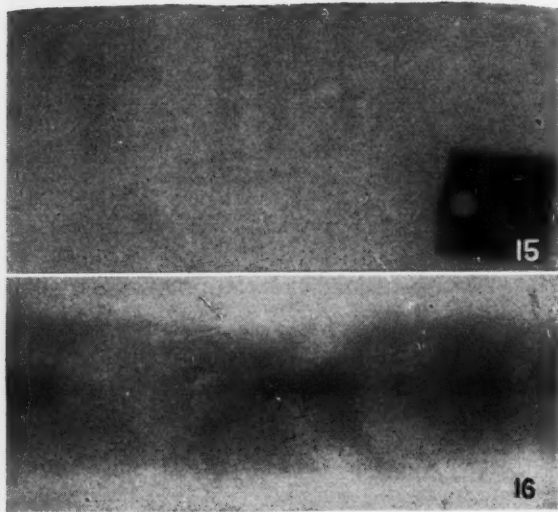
Typical exograph of a sound weld. Only by reference to the markers can the weld zone be determined.
